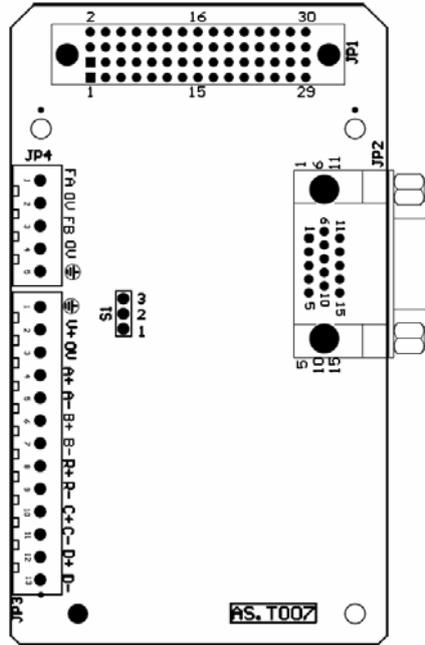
Terminal alignment of the SIN/COS PG card (J board) for synchronous motors
